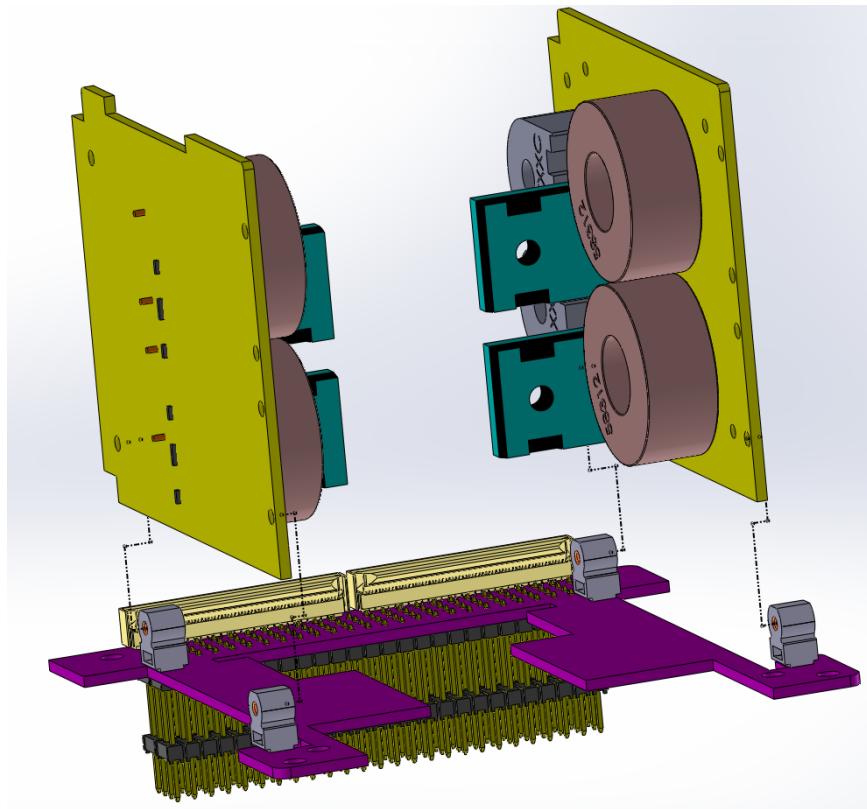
Line up the Right Angle Connectors on the Bottom Board with the holes shown on BPL and BPR.
